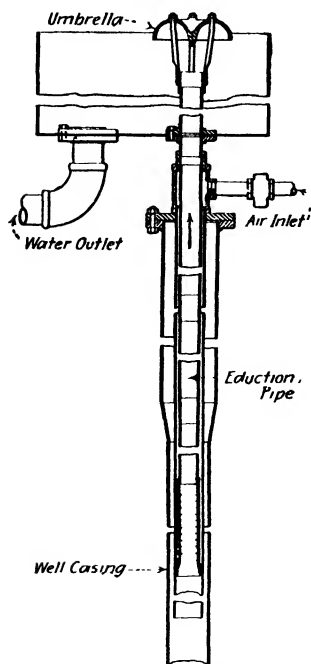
Sullivan special air lift pump and umbrella well head.
